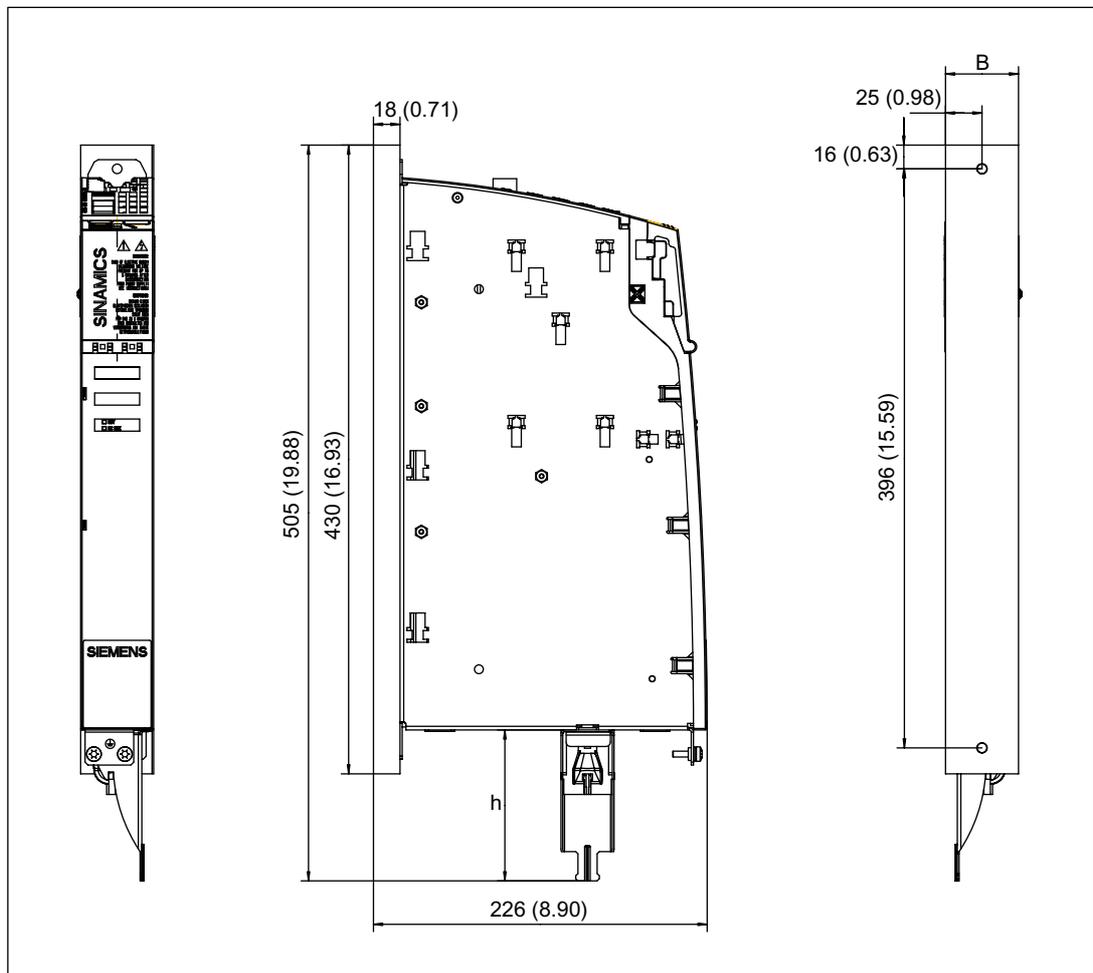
Dimension drawing of Motor Module with cold plate 3 A to 18 A and 2 x 3 A to 2 x 9 A, all dimensions in mm and (inches)
